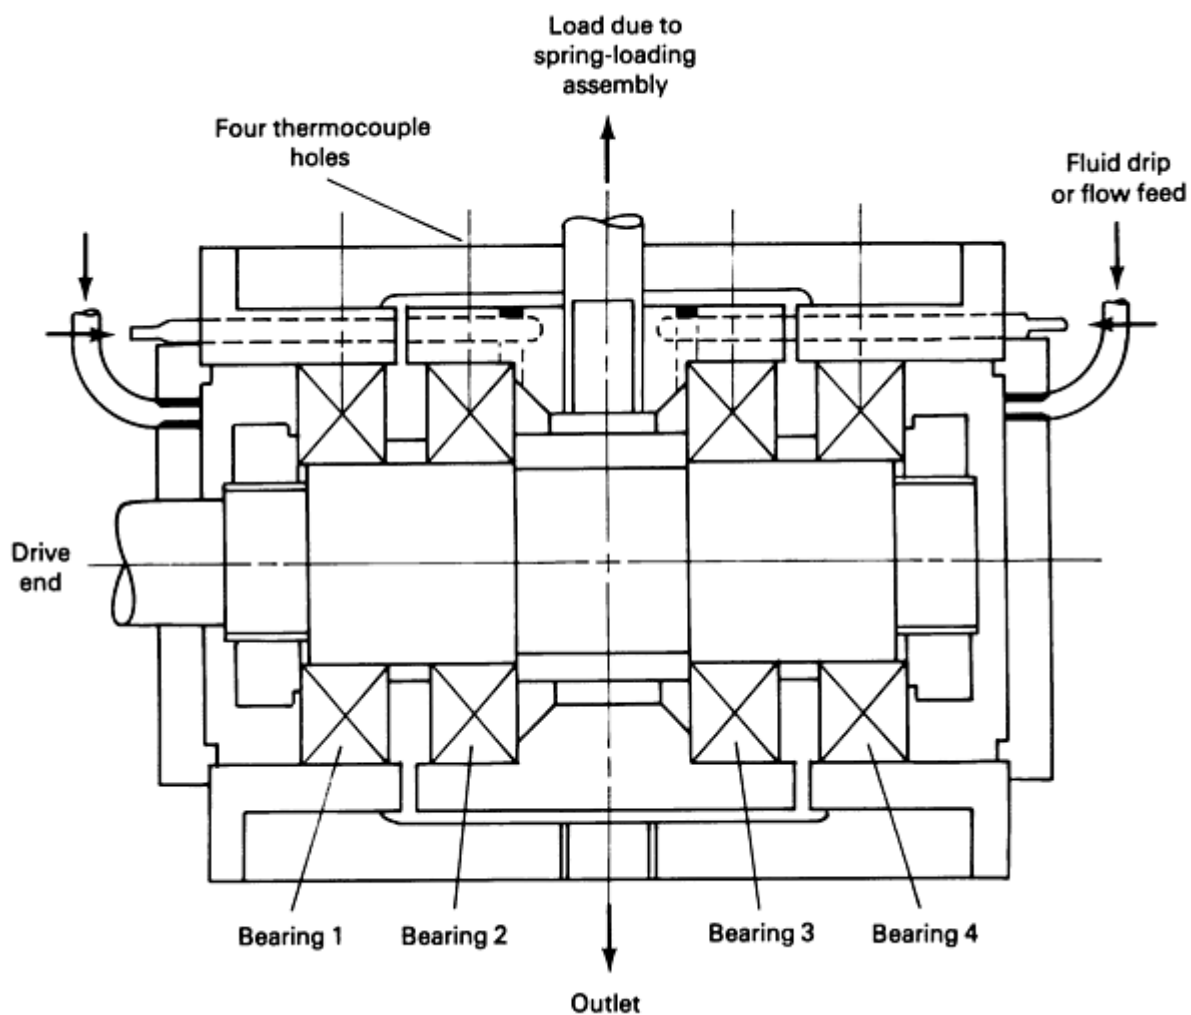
Four-bearing RCF testing apparatus. See Table 1.
